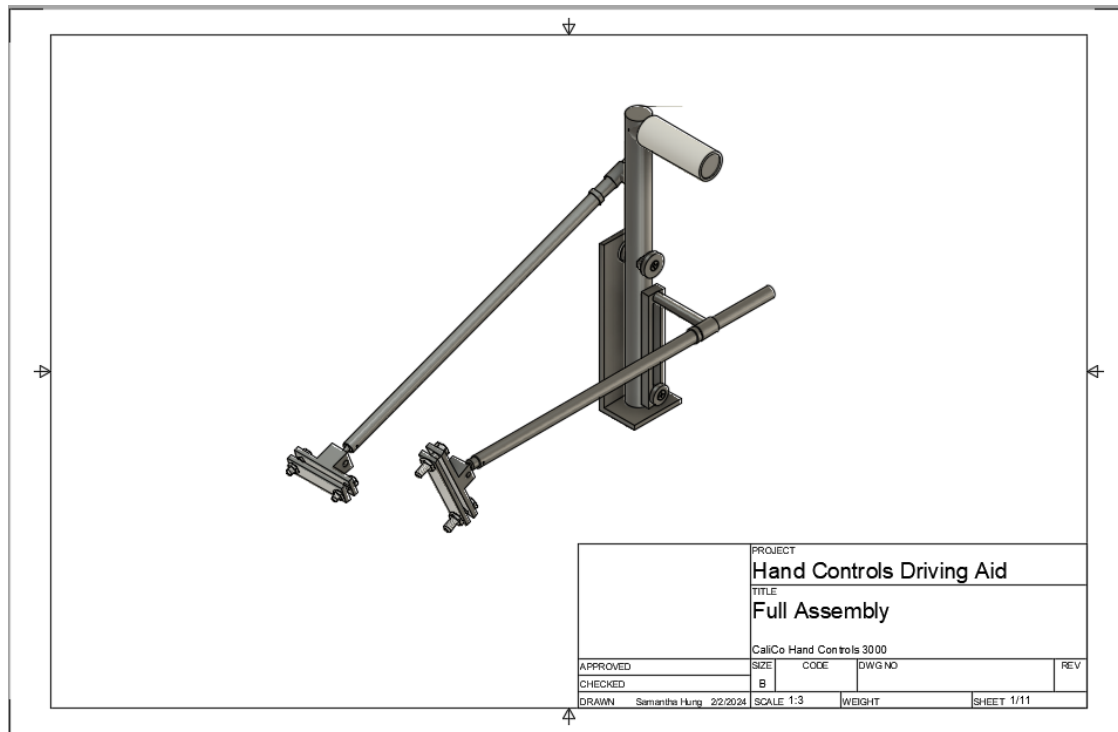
Isometric view of the full and final design of the hand-controlled driving aid
